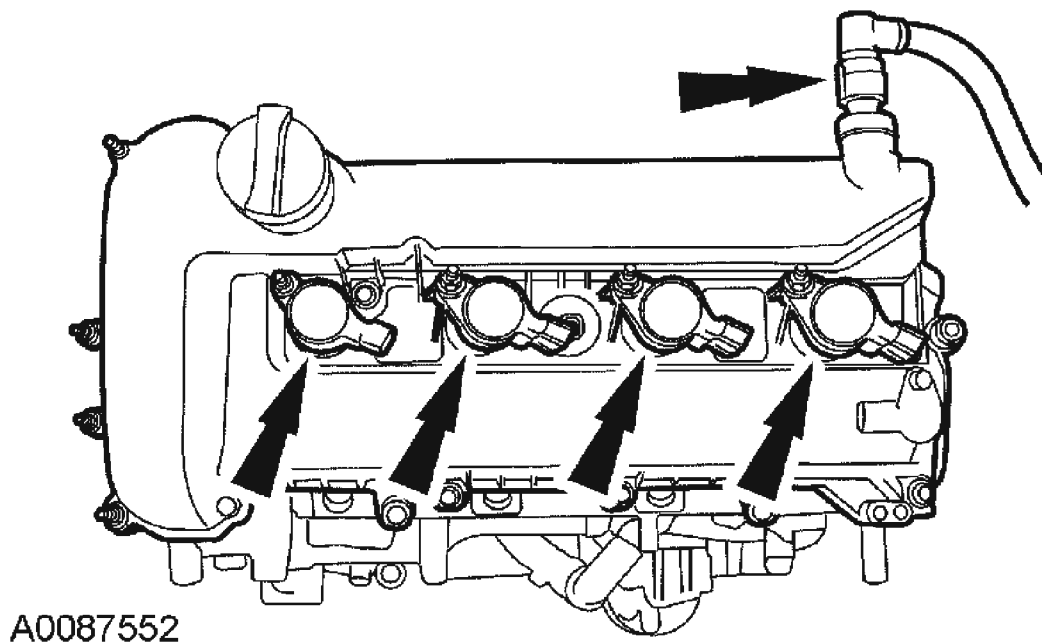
Removing Crankcase Vent Tube And Coil-On-Plugs
